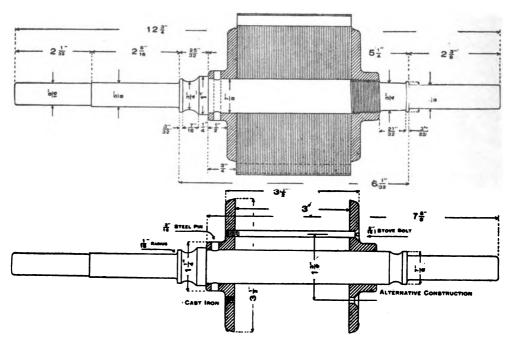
CONSTRUCTIONAL DETAILS OF SHAFT AND ROTOR CORE
